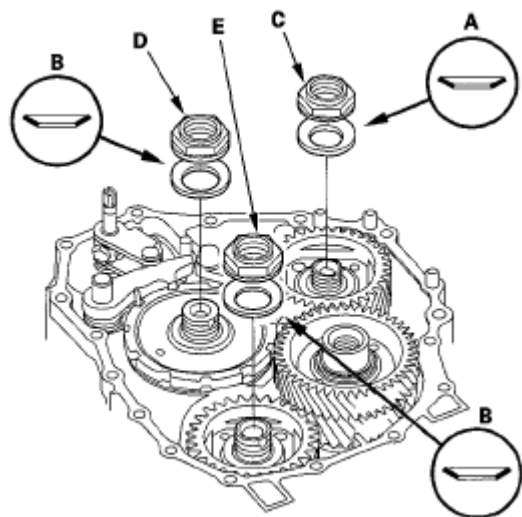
Identifying Conical Spring Washers, Mainshaft Locknut And Countershaft Locknut
